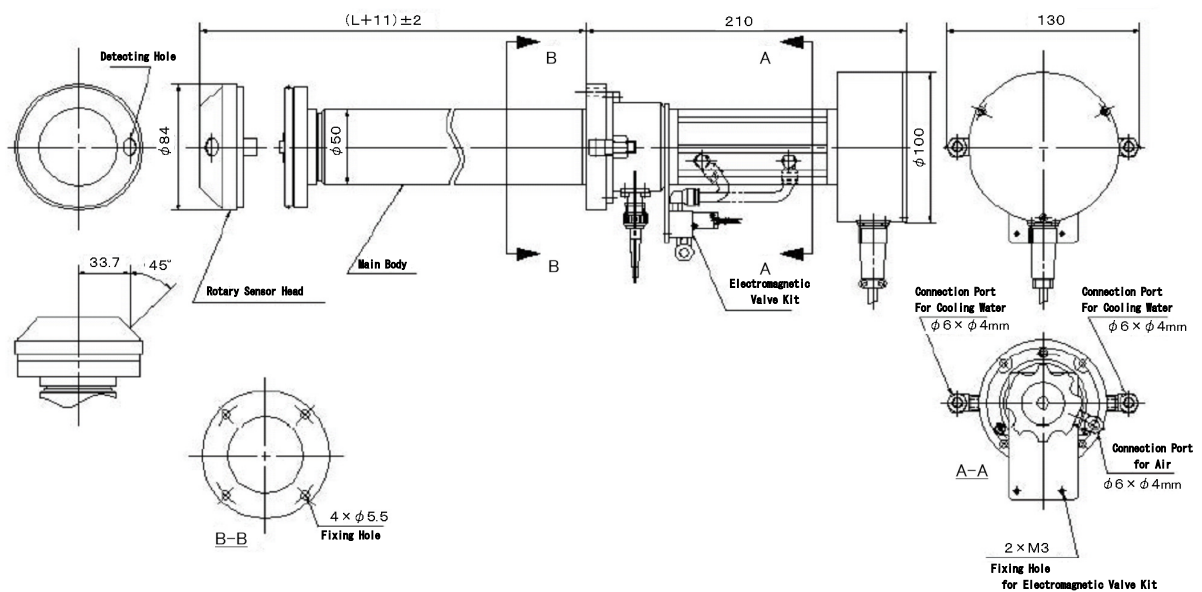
Rotary Sensor with Rotary Sensor Head 45 and Electromagnetic Valve Kit
